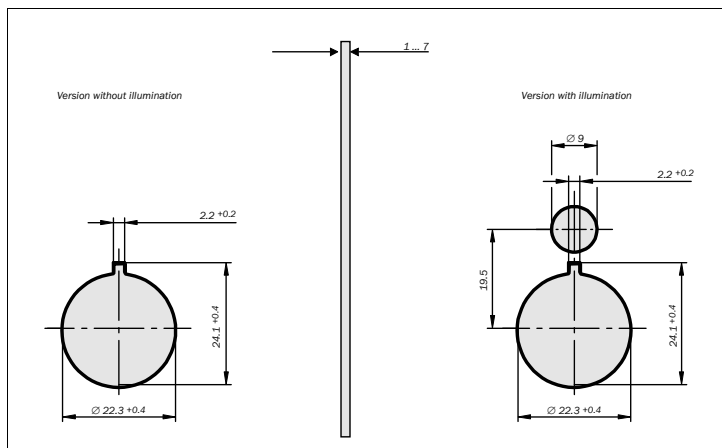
Dimensional drawings of the mounting holes for the built-in versions (mm)
